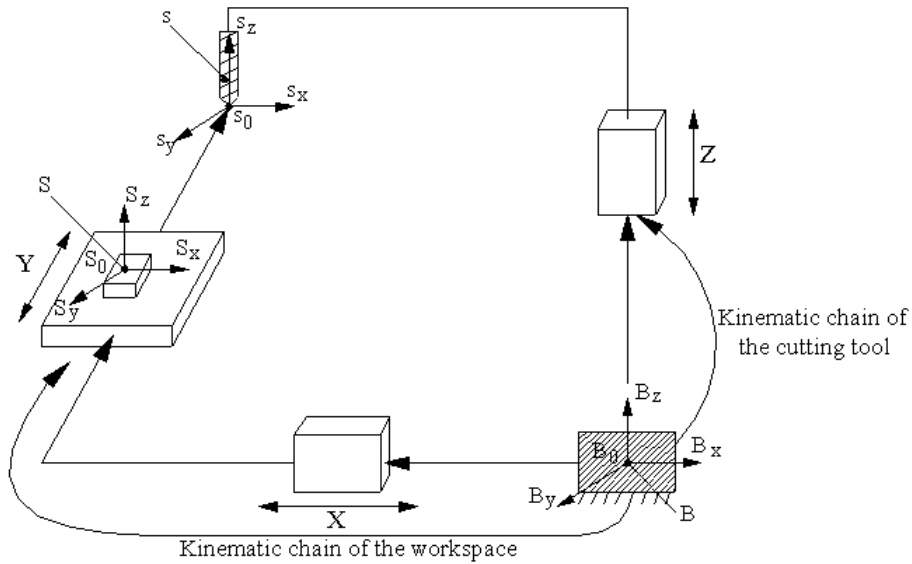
Kinematic linkage and relation between axes on the CNC vertical machining centre
